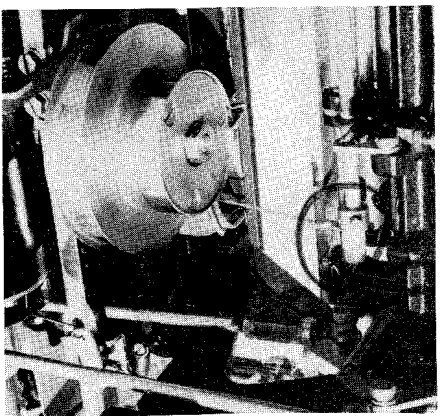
Photo showing the solder joint on the line feed push bar from the attached wire.
